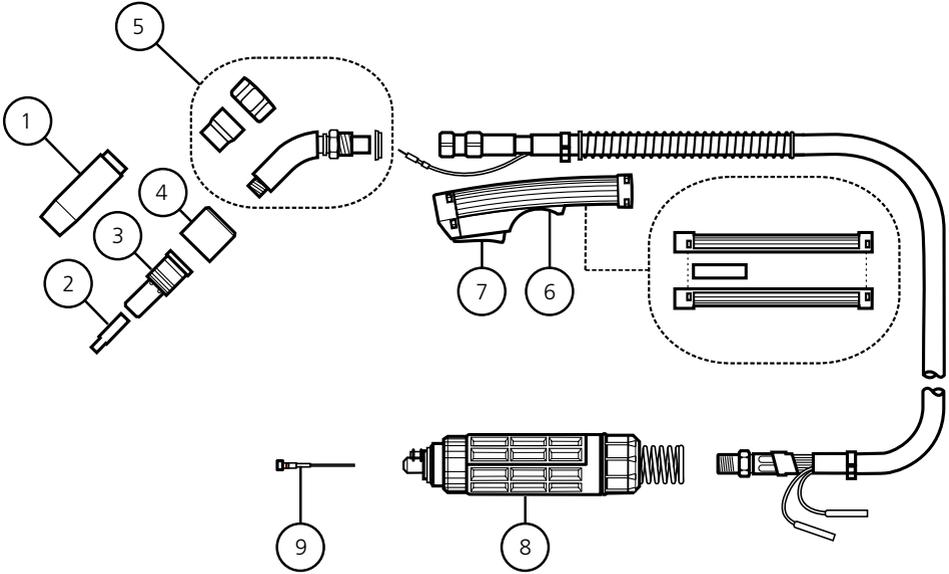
GUN001 (200 amp) Gun and Cable Assembly
